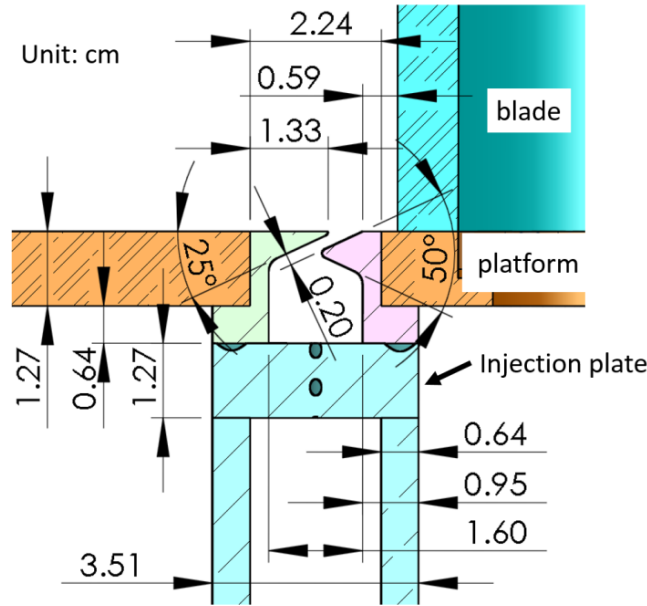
Sectional view of the geometry of the inlet purge seal, (swirl) injection plate, and part of the plenum. (Reprinted from Chen et al. [2])
